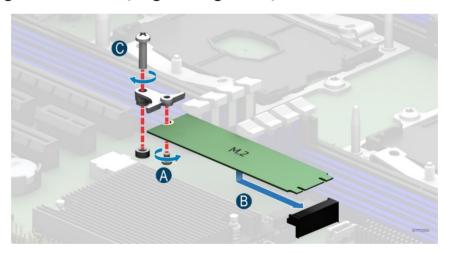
Installing One M.2 Storage Device - S2600ST Board Family
